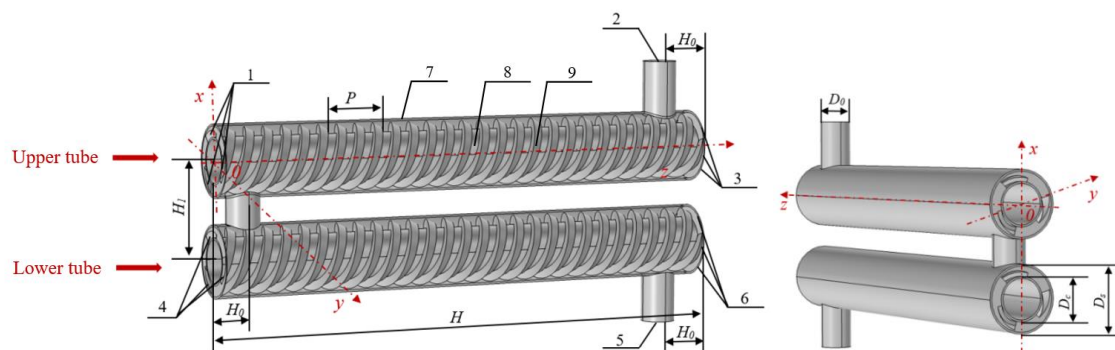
Physical schematic of two-layer screw-driving spiral heat exchanger. 1—flue gas inlet on the upper tube; 2—oil-based drilling cuttings inlet; 3—flue gas outlet on the upper tube; 4—flue gas outlet on the lower tube; 5—oil-based drilling cuttings outlet; 6—flue gas inlet on the lower tube; 7—shell; 8—screw mother tube; 9—spiral tube.
